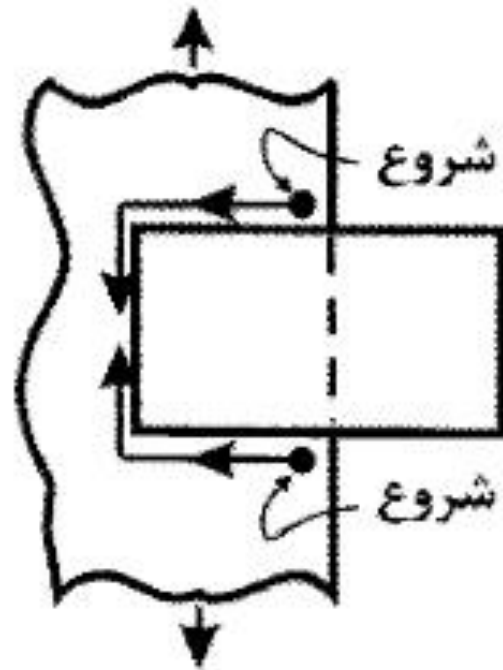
Fillet Welds on Opposite Sides of a Common Plane (see 2.9.3.5)
